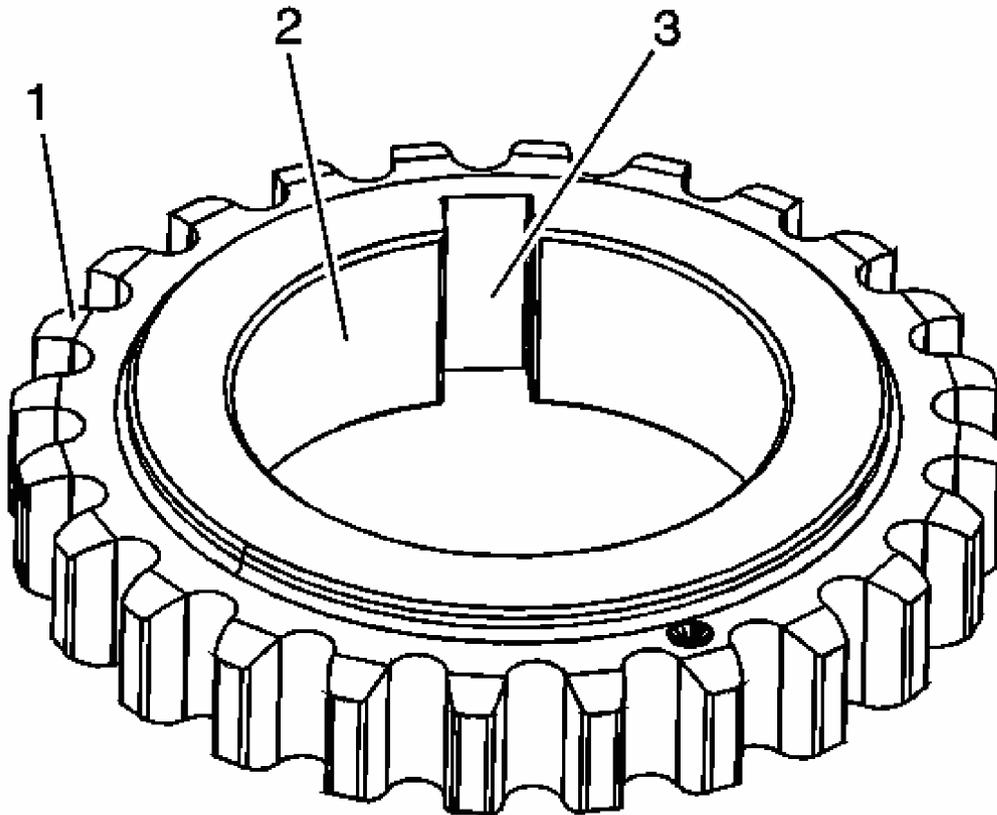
Checking Crankshaft Sprocket With Primary (IT) Inverted Tooth Chain
